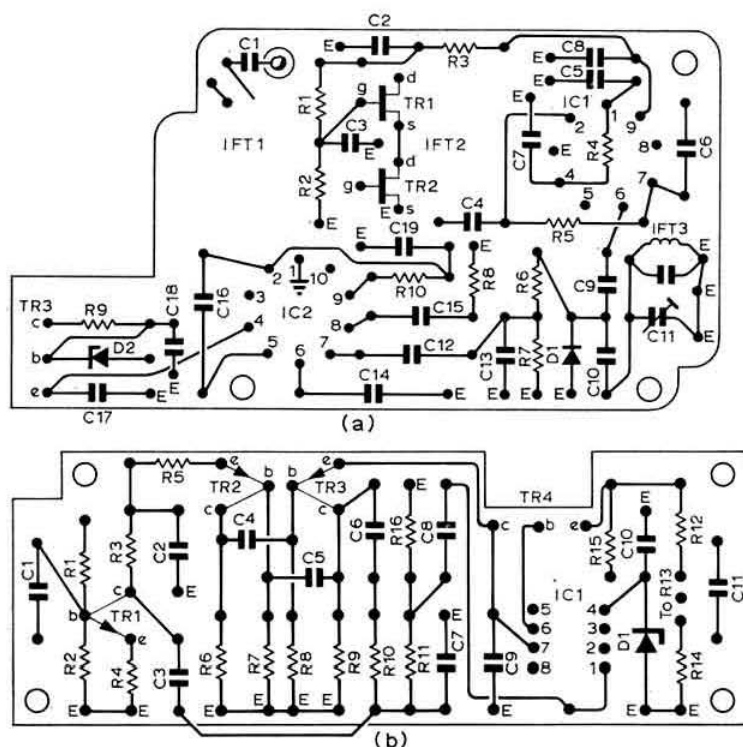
Typical component layouts and wiring: (a) i.f./af board and (b) modulator/psu board which uses a μ A741 in the stabilizer section instead of discrete components. Both boards are actual size and are wired for negative earth
